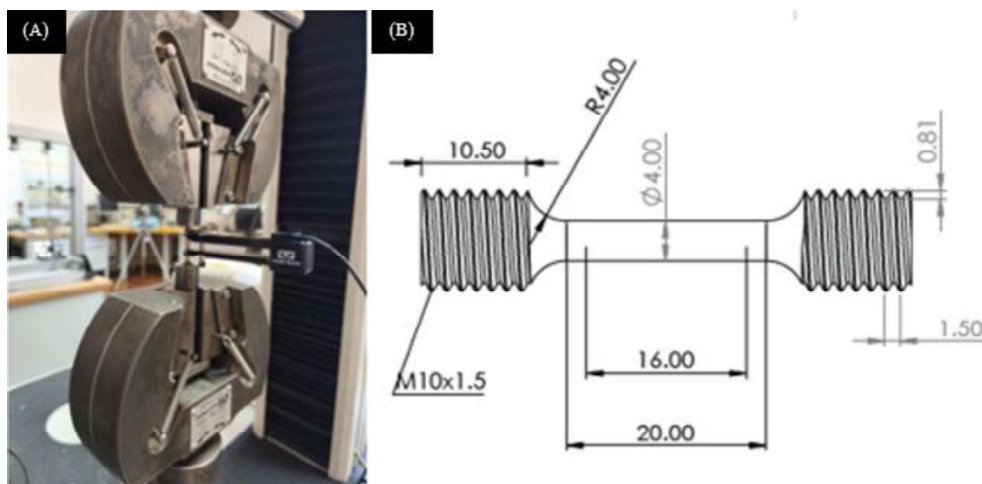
(A) Tensile testing on Instron 3369 universal testing machine and (B) machined cylindrical specimens of the Ti alloys. measures
